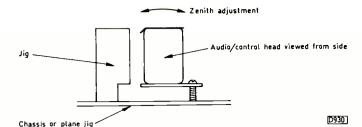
Zenith adjustment using a vertical jig. I use the reel disc height jig from the old Ferguson 3V00 VCR service kit but any suitable straight edge will generally do.
